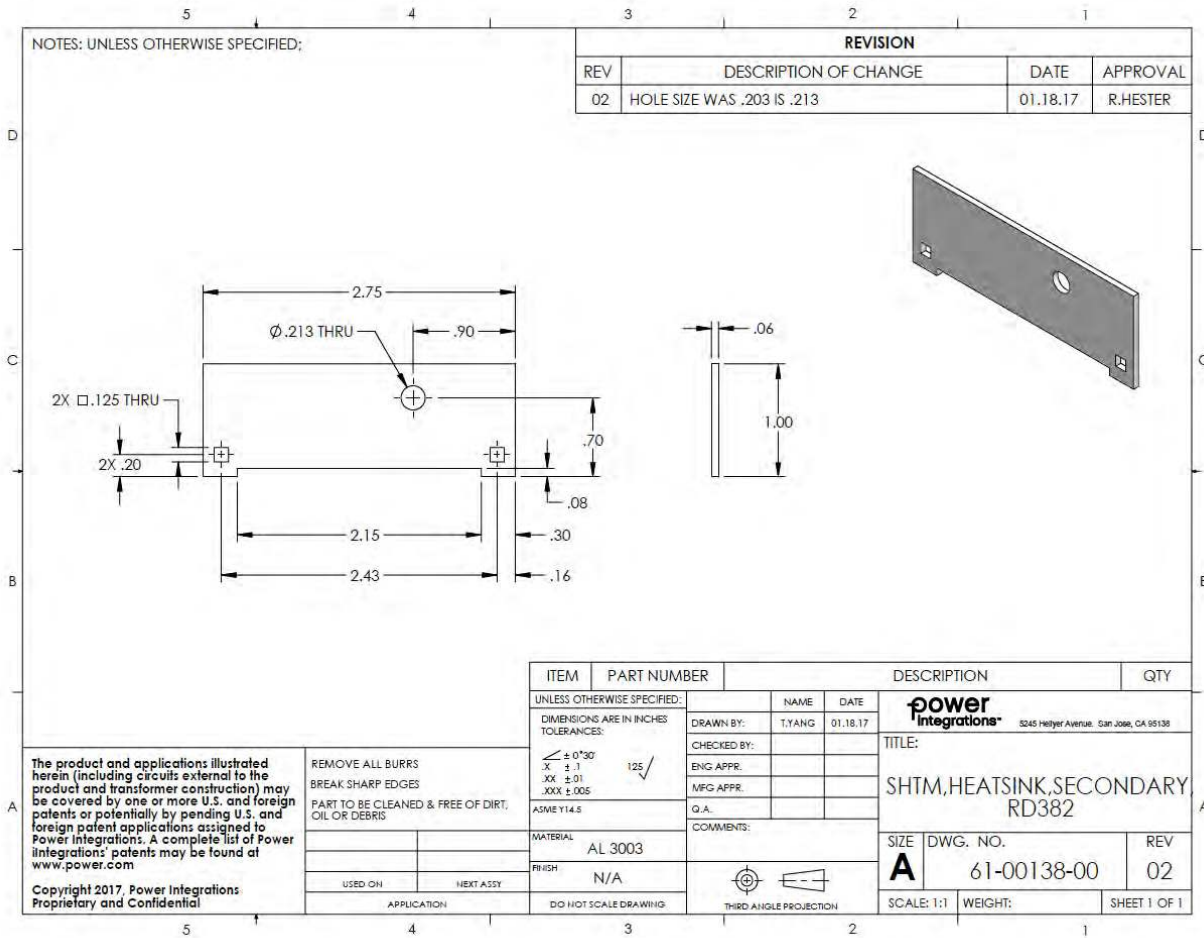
Secondary Heat Sink Sheet Metal Drawing.
